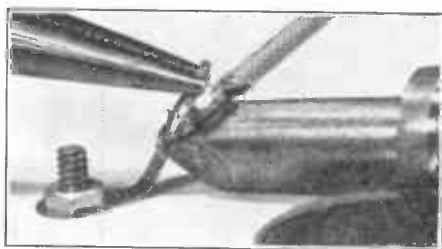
Method of unsoldering a permanent hook joint on a soldered lug. Spread open the hook with long-nose pliers while keeping the solder molten by holding the soldering iron under the lug.
